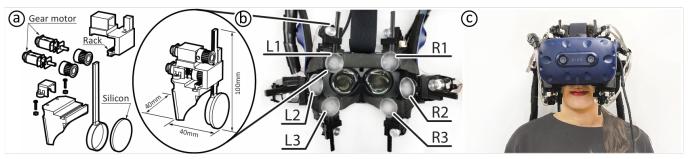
The Masque prototype actuates three pairs of skin stretch modules. The (a) exploded view and (b) the hardware implementation of the skin stretch module. (c) A user wears the Masque prototype.
